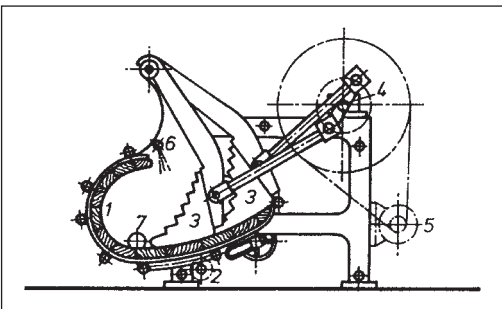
Hammer milling machine, Model SHV (Hemmer). 1 = machine trough; 2 = trough adjustment device; 3 = milling hammer; 4 = crank; 5 = drive motor; 6 = spray tube; 7 = trough drain.
